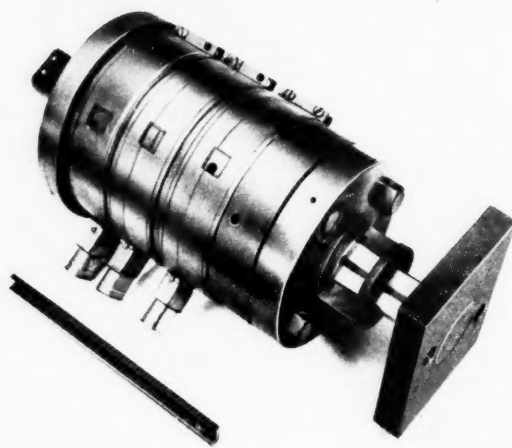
Extrusion Die Assembled with Punch and Heating Bands
